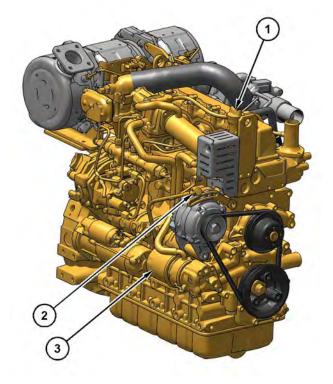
C3.3B Engine (1) Oil Filler Cap (2) Oil Level Gauge (3) Oil Filter
